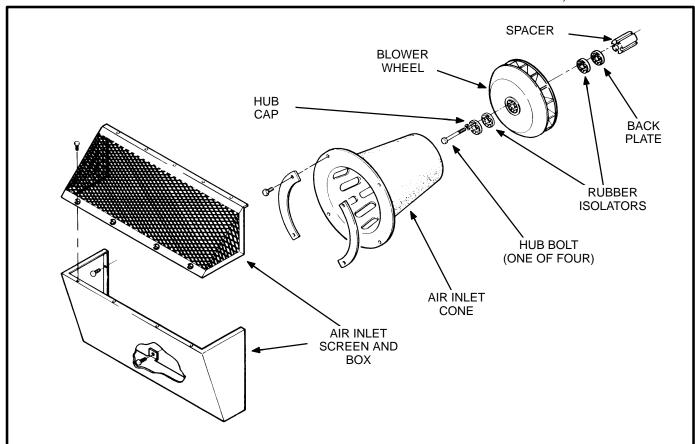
QSG-SERIES RADIATOR COOLING BLOWER
